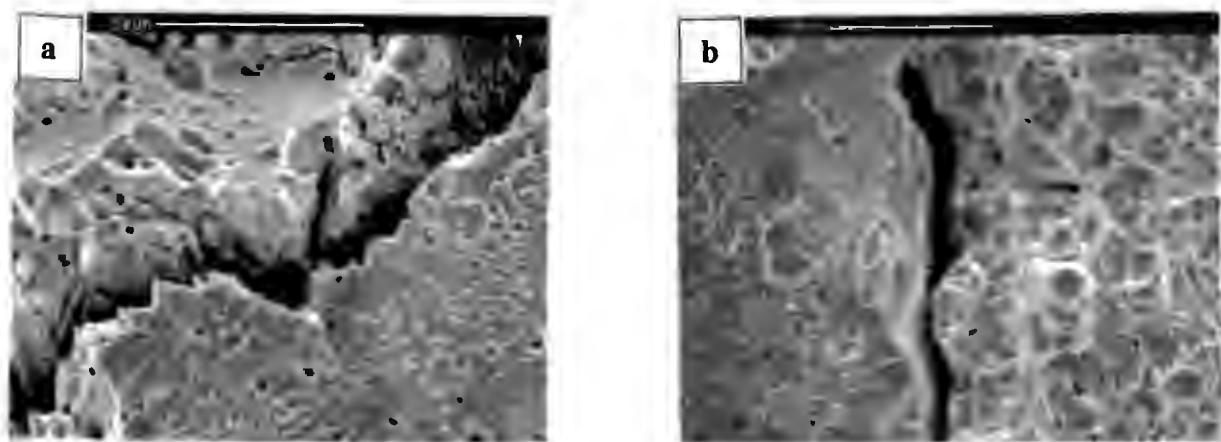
Fracture surface of tensile test at 20°C:
